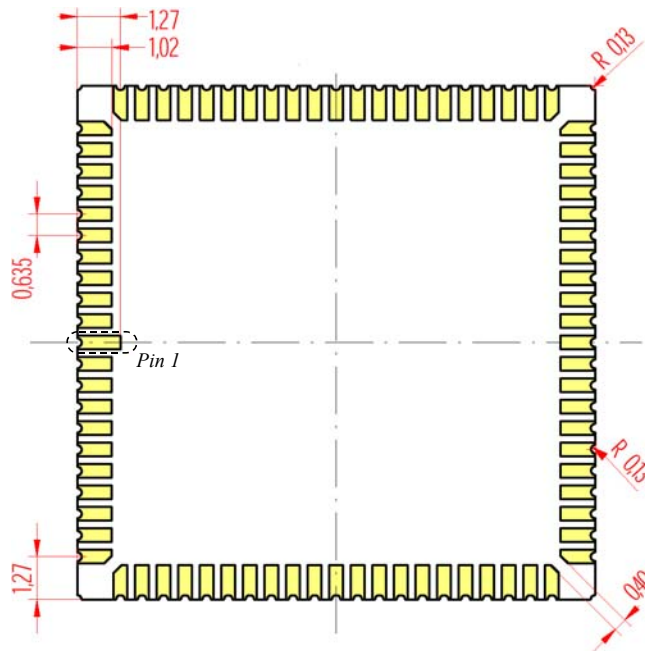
Bottom view of the 84-pins LCC package (all dimensions in mm).
